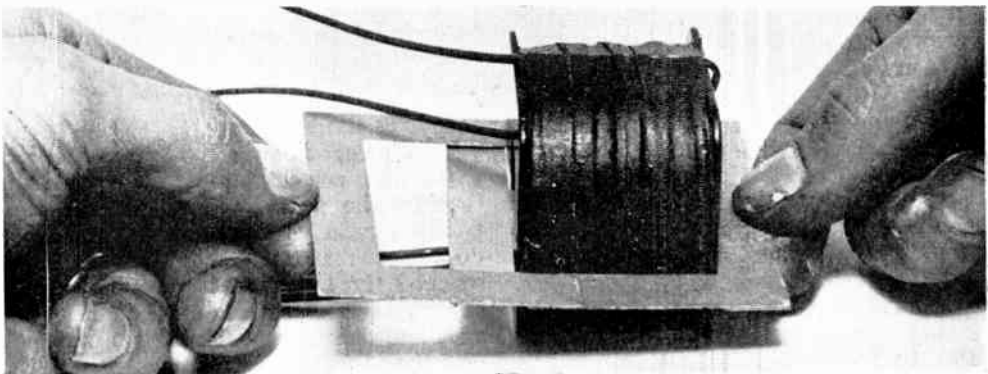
ASSEMBLING THE STAMPINGS. THIRD OPERATION.
